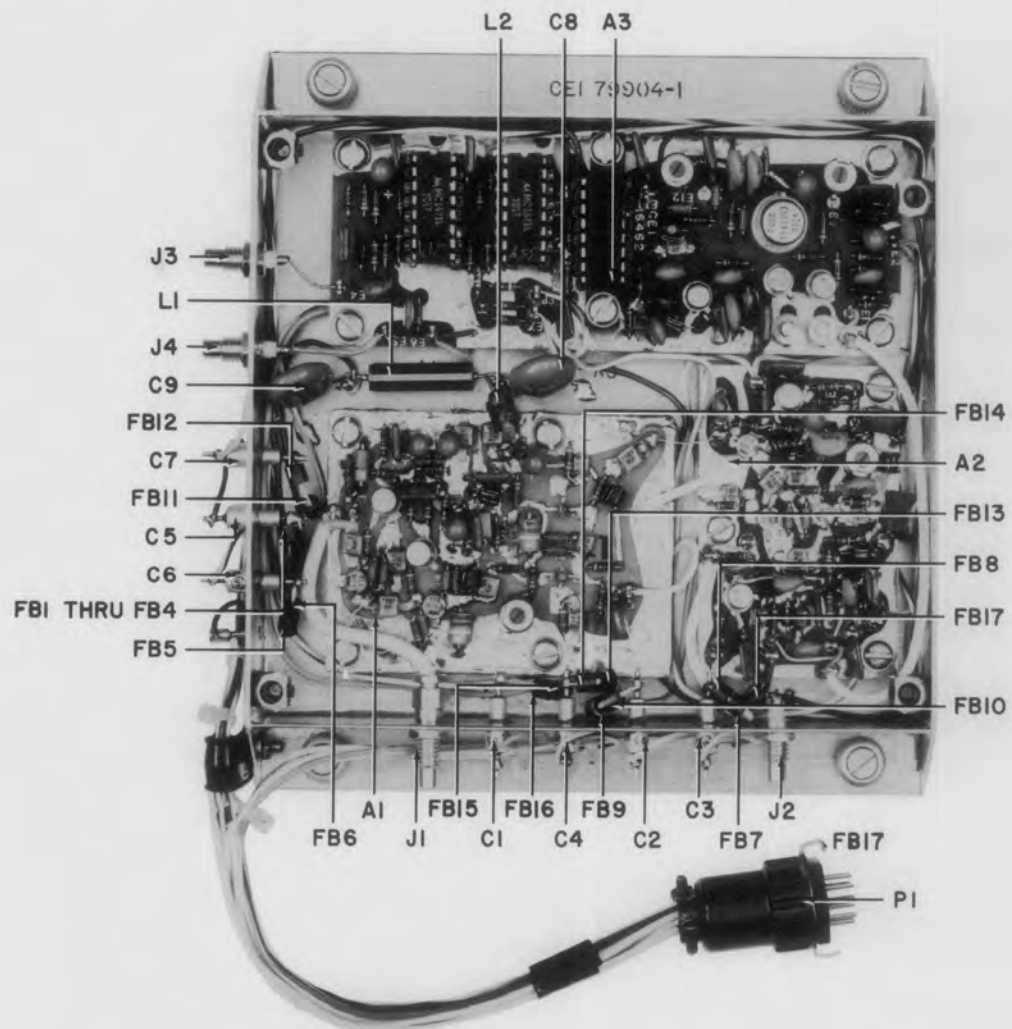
Type 79904-1 and 79904-2 Prescaler Assembly (A1), Location of Components
